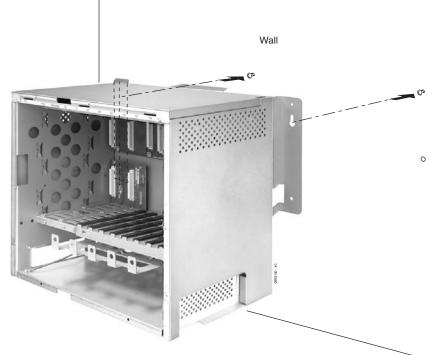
ATTACHING THE CABINET TO THE MOUNTING BRACKET
